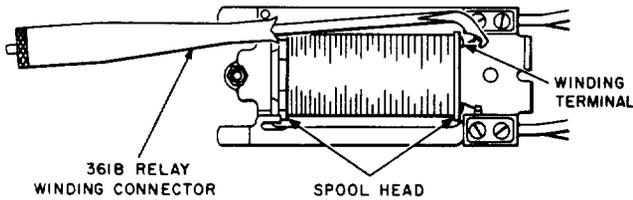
Connecting to Winding Terminal at an R-Type Relay
